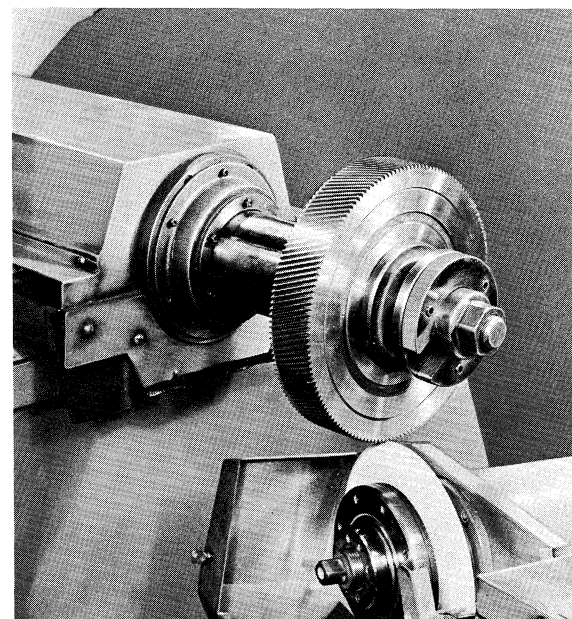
Grinding a rolling die on a special automatic grinder.
